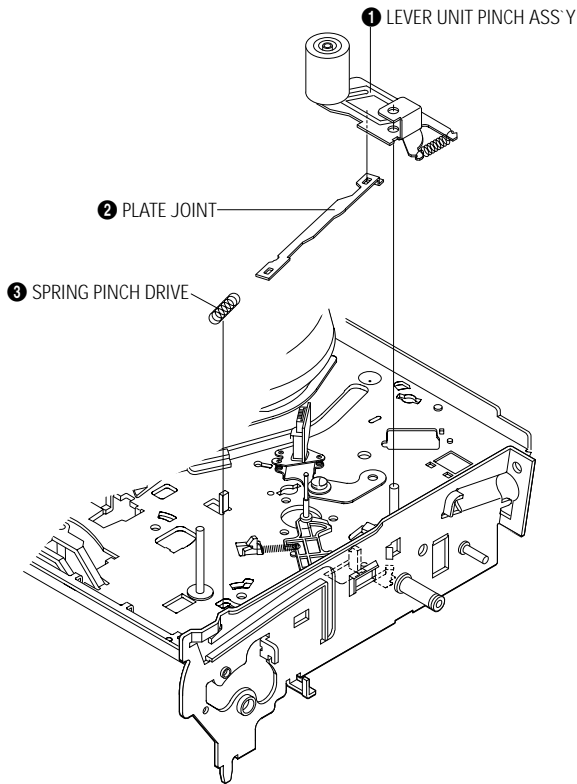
Lever Unit Pinch Ass'y, Plate Joint, Spring Pinch Drive Removal
